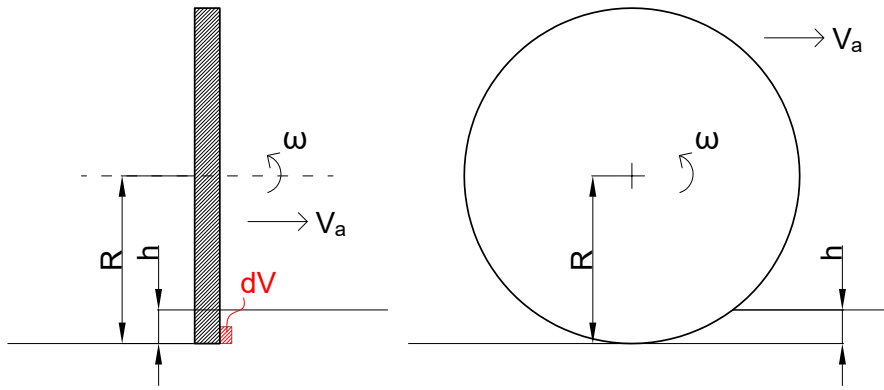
Two main approaches to the burr: deburring using the flat grinding wheel's face (to the left) and deburring using the cylindrical face of the wheel (to the right)
